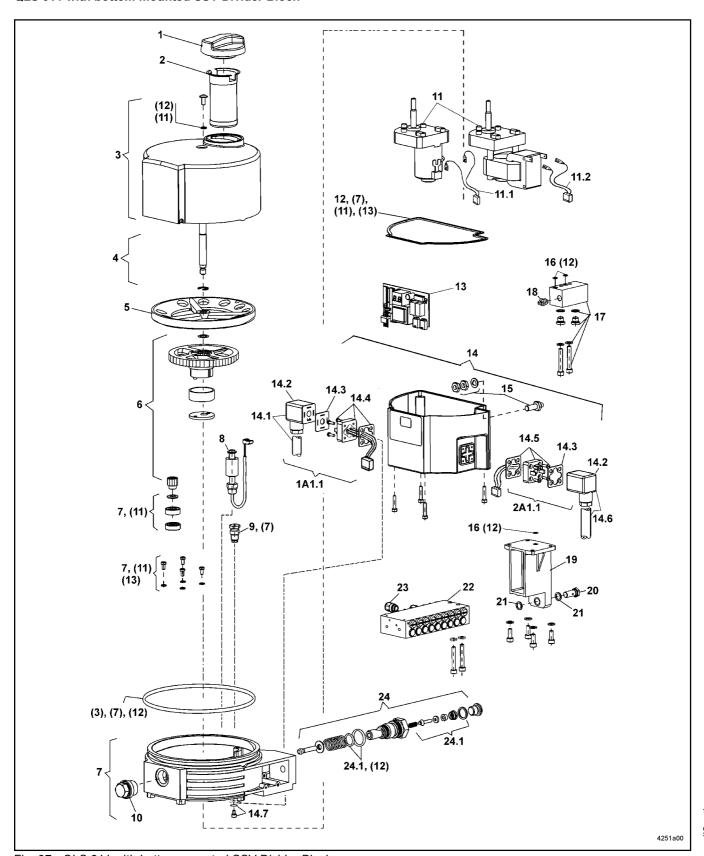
QLS 311 with bottom mounted SSV Divider Block
